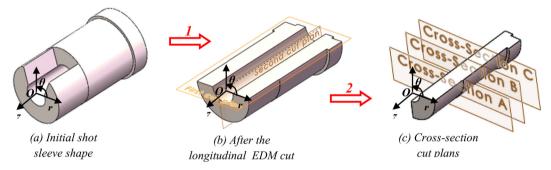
CAO schema of shot-sleeve cutting planes: (a) Initial shot sleeve shape, (b) After the longitudinal EDM cut, (c) Cross-section cut plans.
